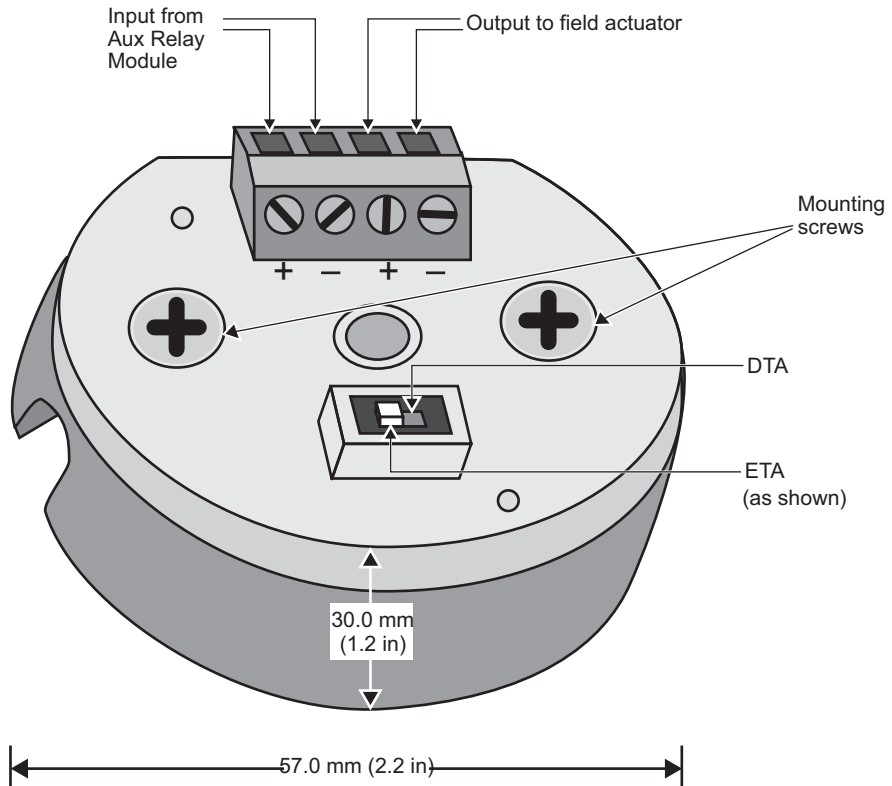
Auxiliary Relay Diode Module Connections, Switch Positions, and Dimensions
